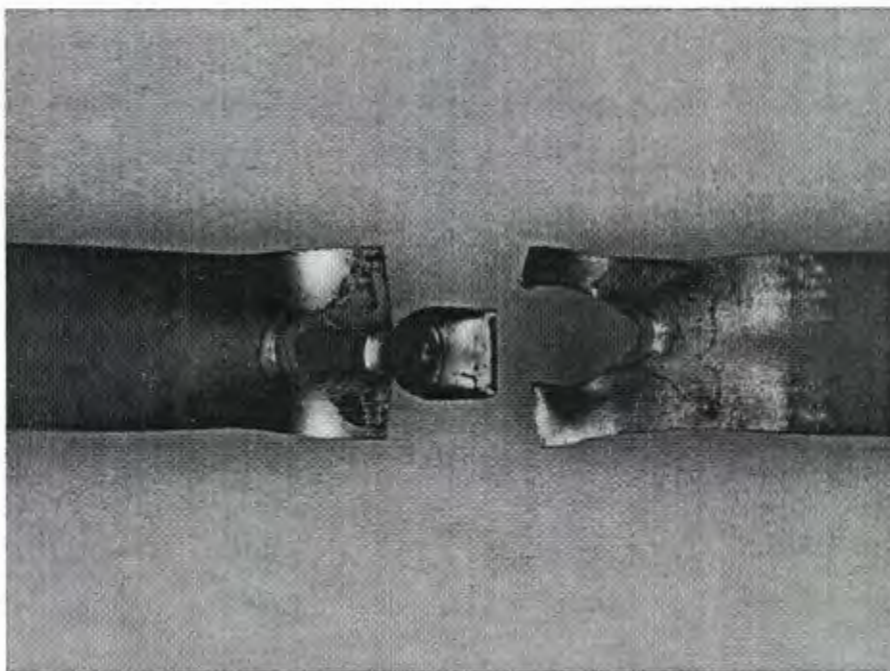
"Metal tearing" failure of an improved spot weld tensile shear specimen; magnified 1 $\times$ .
